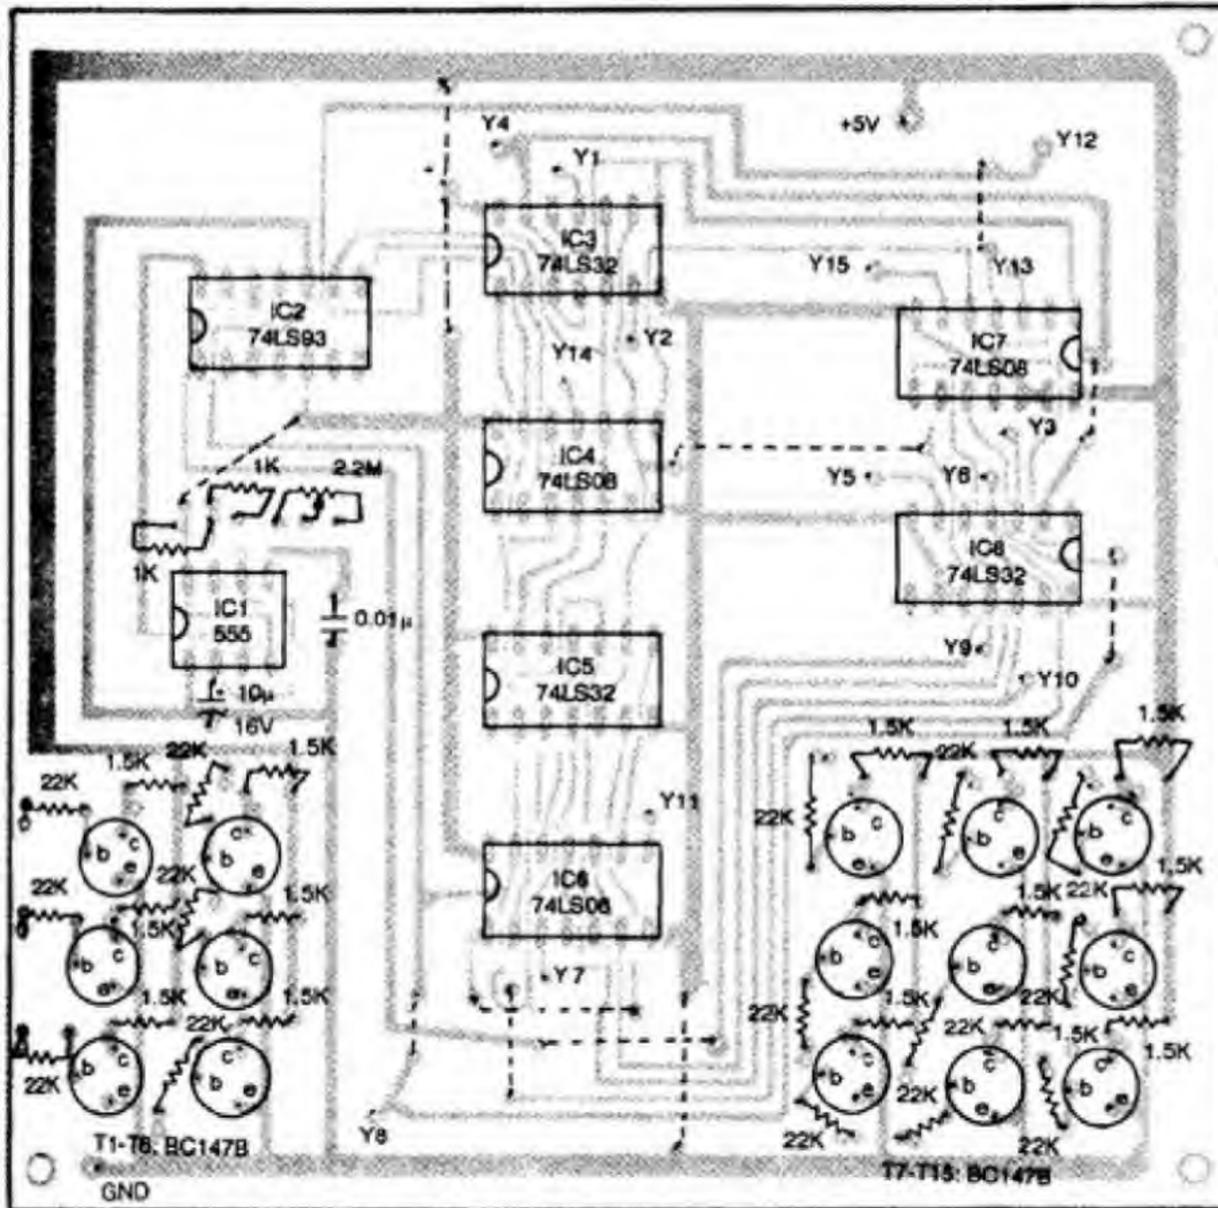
Components layout for the PCB shown in the Fig. 3.
